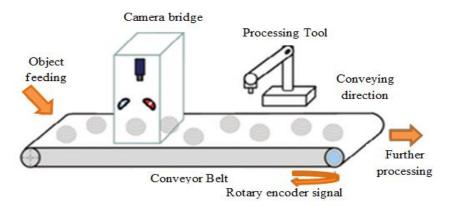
8 :Concept of the inspection and processing system (Weyrich et
